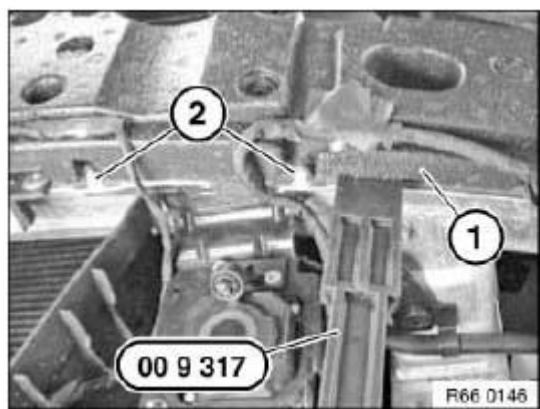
Identifying Nuts And Impact Absorber With Special Tool 00 9 317
